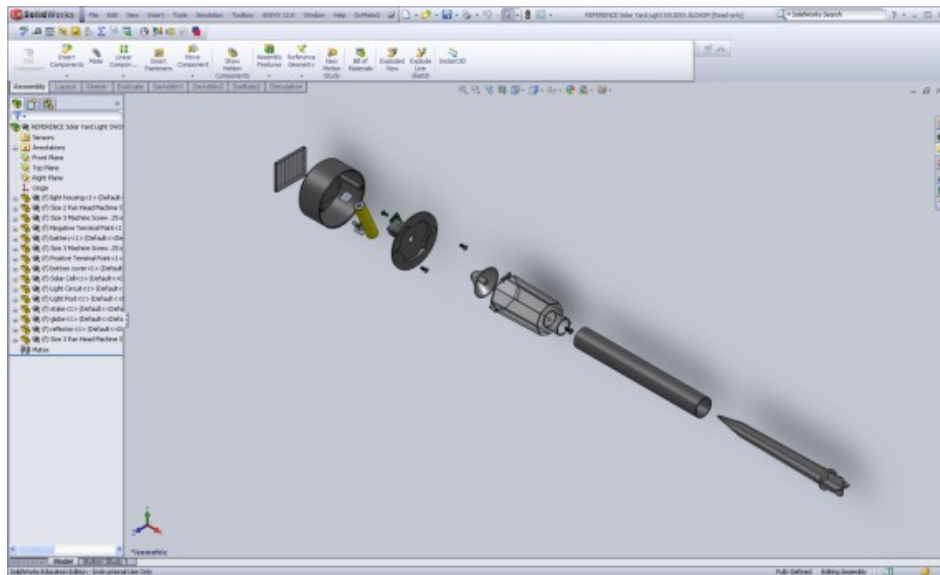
Exploded view of Solar Yard Light Reference Assembly
